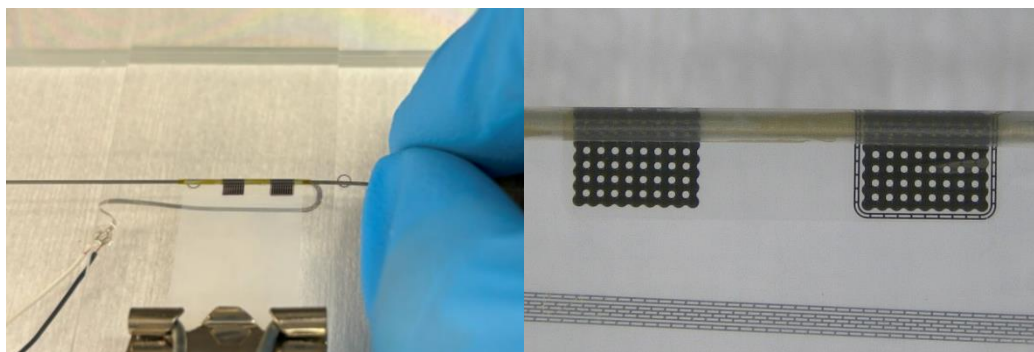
Device partially rolled into the thermoforming fixture, with (right) magnified view.
